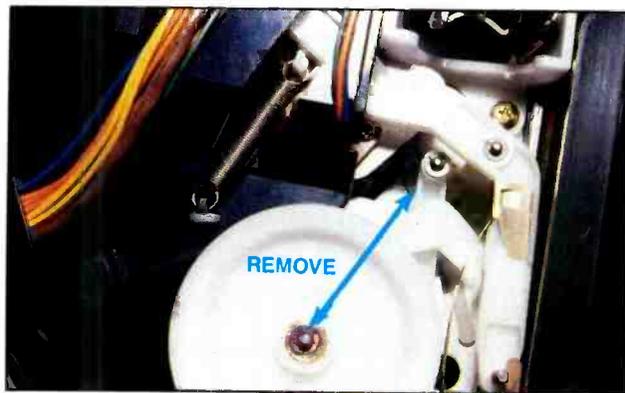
Remove the stopper washers from the gear idler and idler assemblies.
